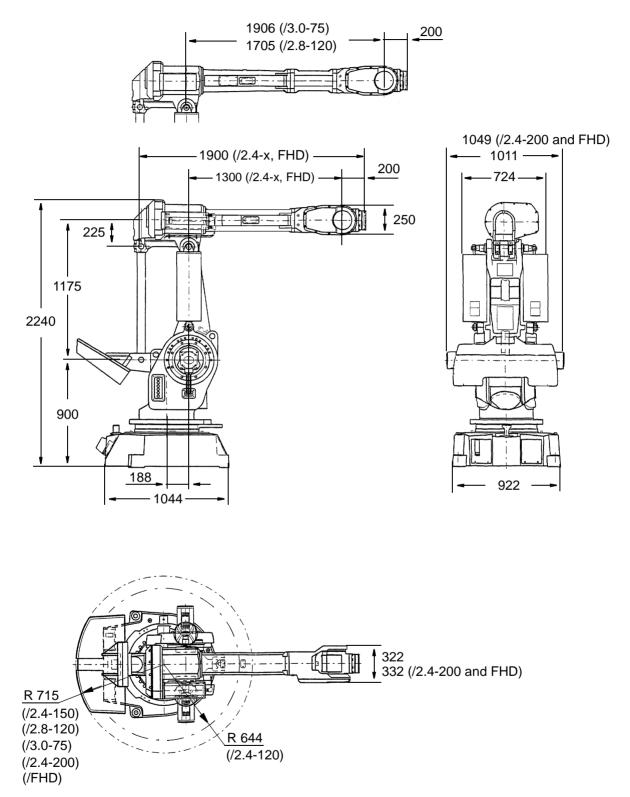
View of the manipulator from the side, rear and above (dimensions in mm).
